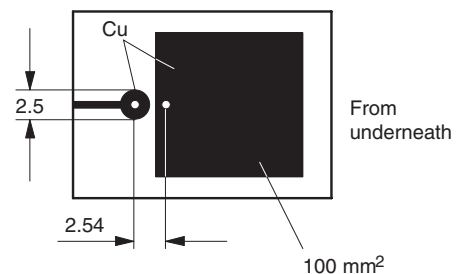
In Case of Assembly on PC Board, with Heatsink (Curve A, Figure 4)
